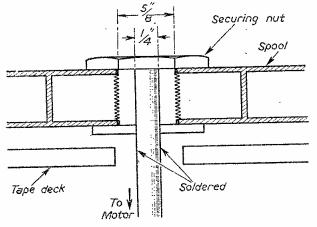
Method of fixing spool to spindle of gramophone motor.
